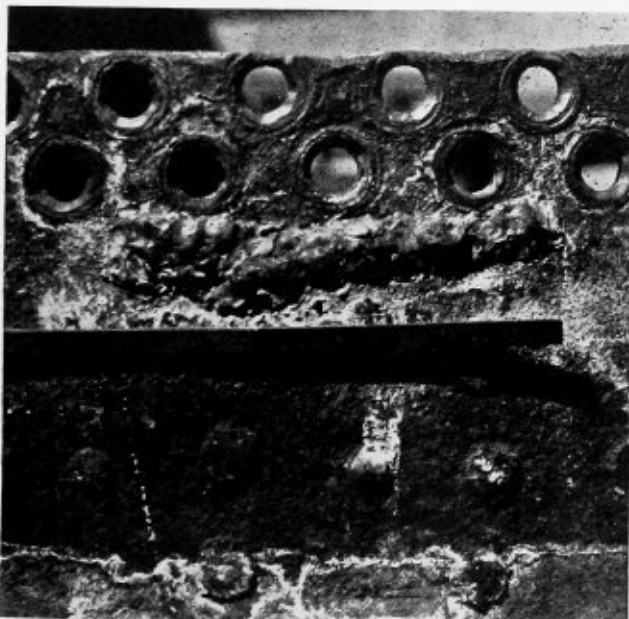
An attempt to repair a crack in a boiler barrel by fusion welding
